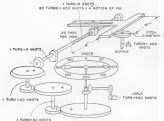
shows four gears of central axis, fixed gears, a screw with a traveling block, a rack and T-shaped member, and finally, a gear that converts the straight-line motion of the rack to rotary motion. For the sake of simplicity, the dimensions has not shown the teeth on the output gear.
